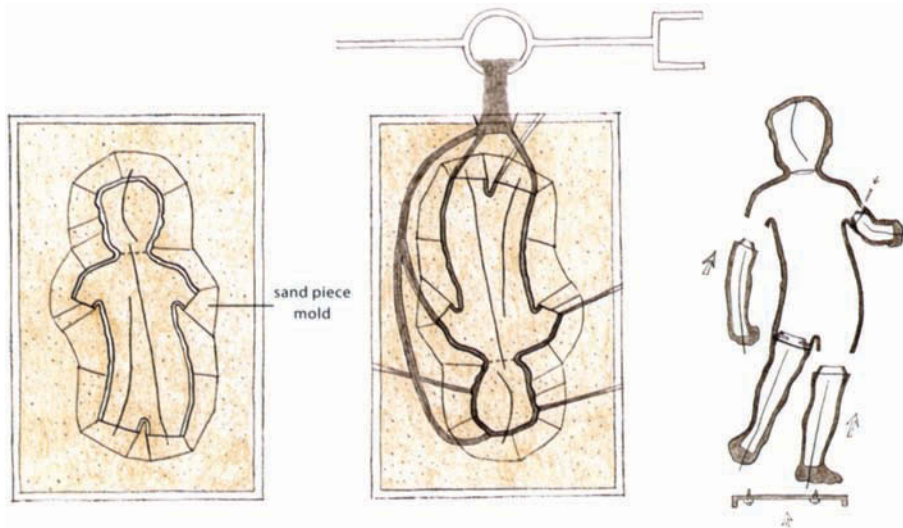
Both sections of the core are then placed back inside the sand piece mold. The core is held in suspension within the mold by the armature rods.
